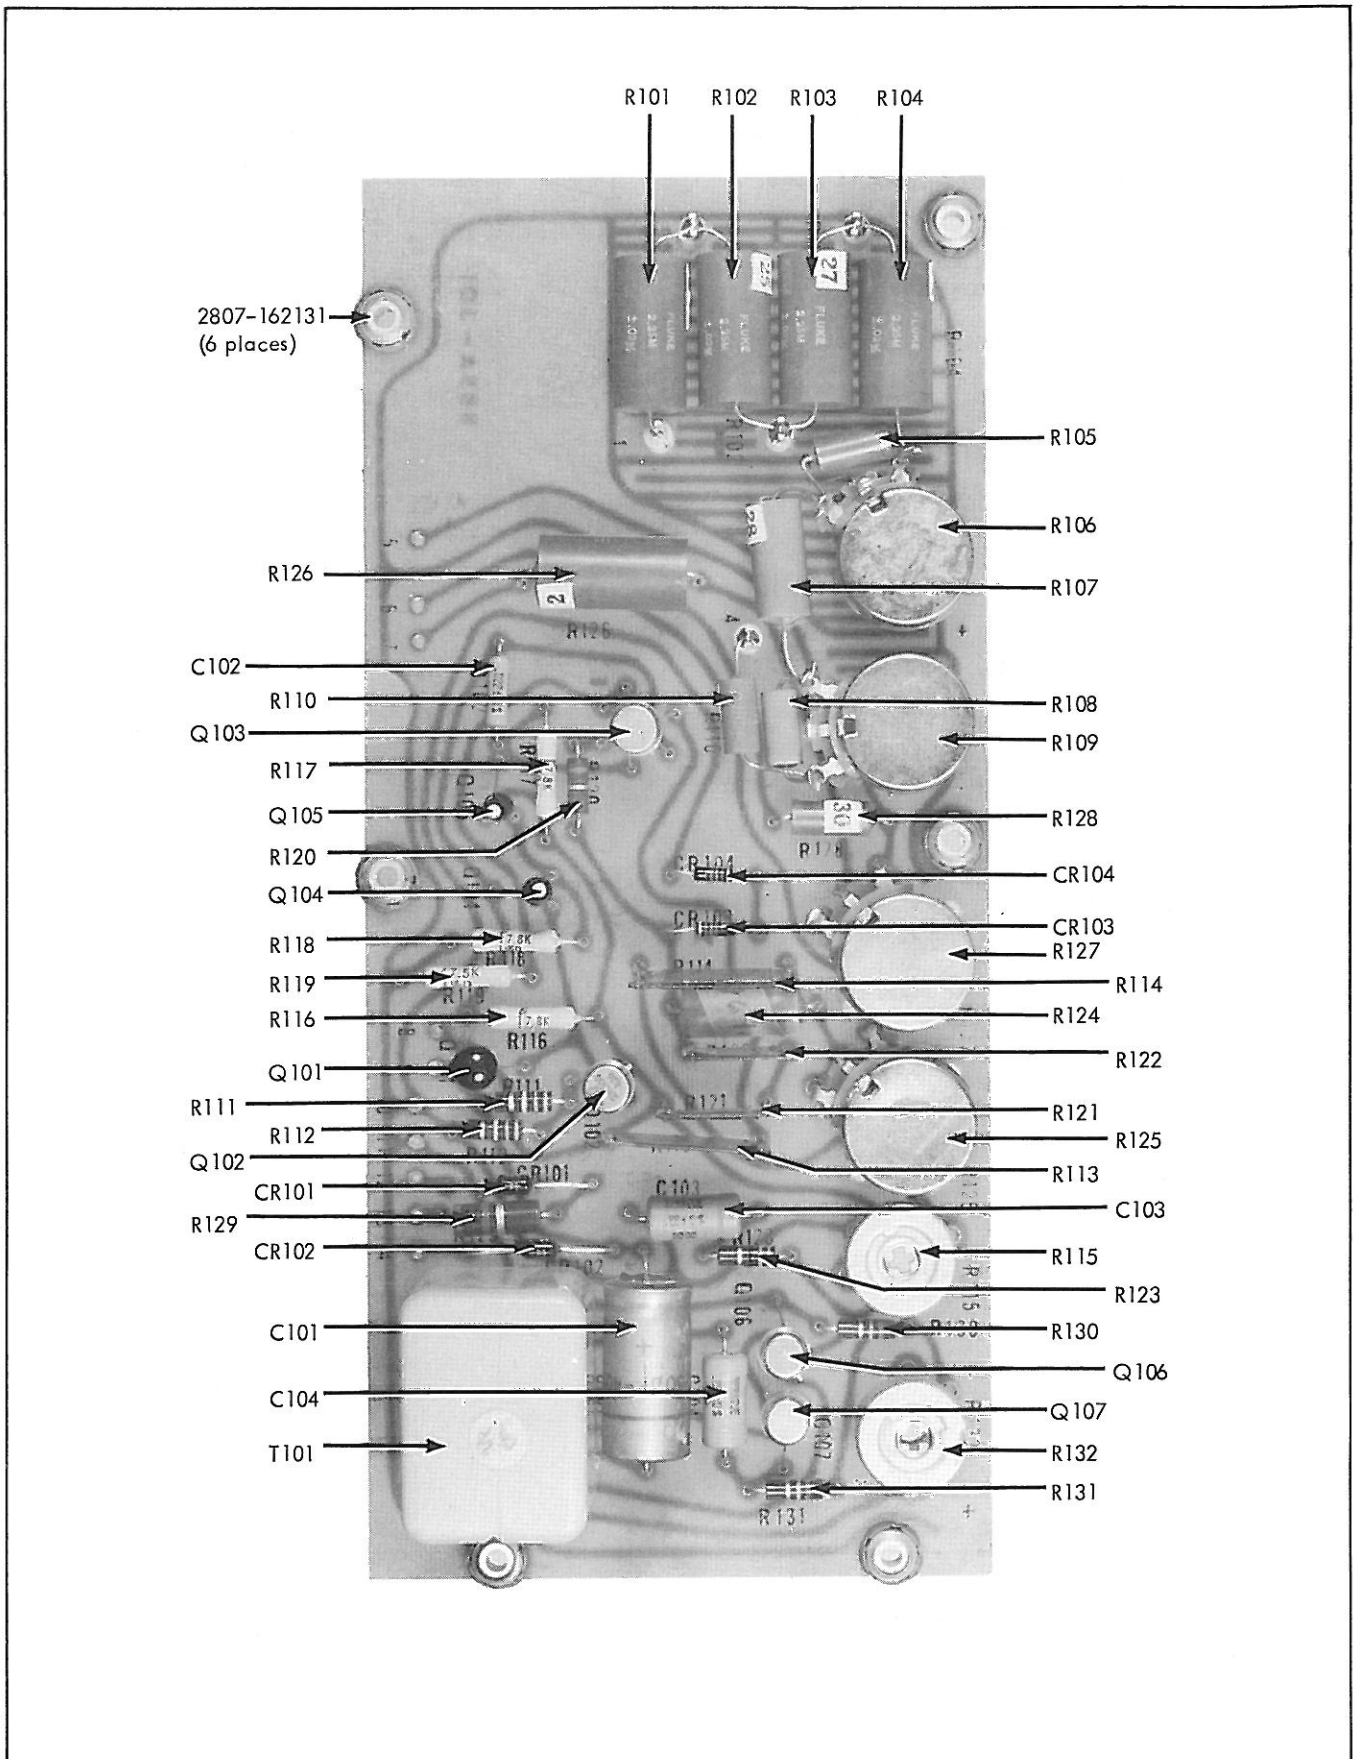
REFERENCE SUPPLY BOARD ASSEMBLY
